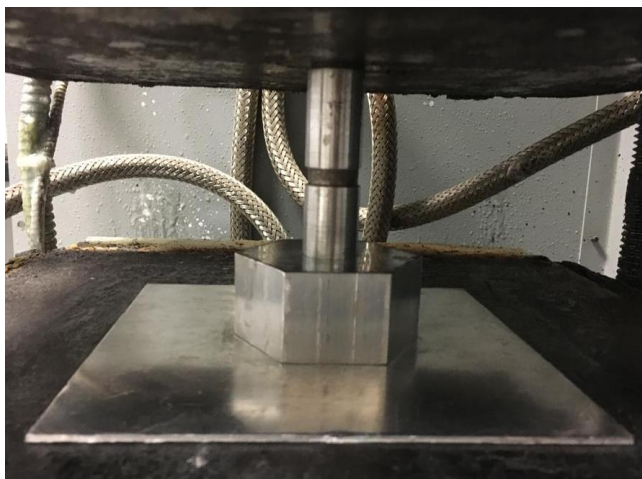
Stainless steel mold containing the powder that is to be packed using the hydraulic press machine
